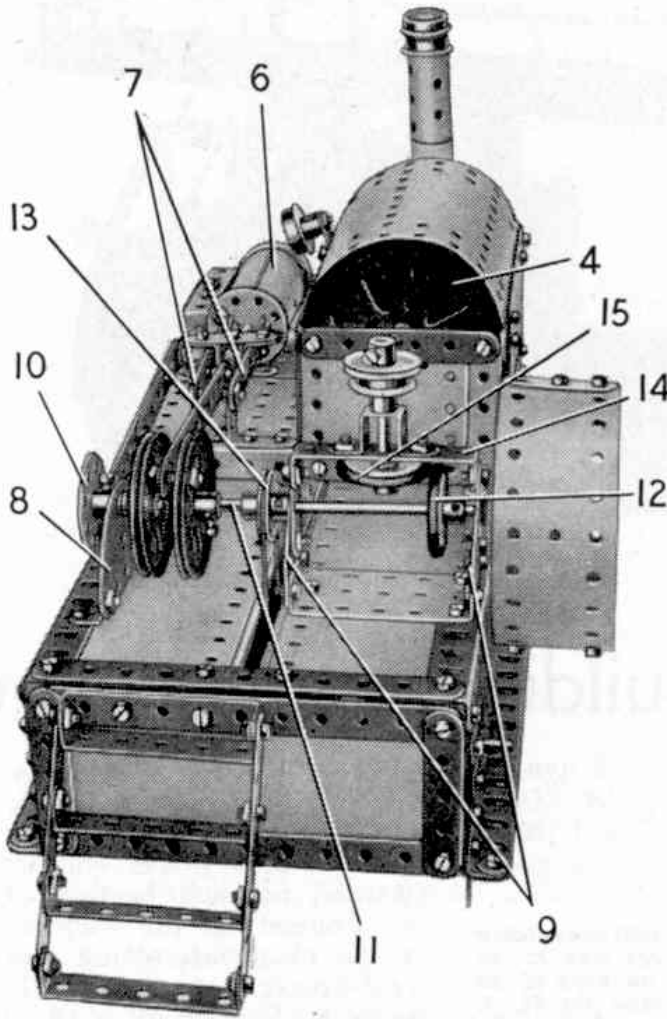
Another view of the steam engine and boiler showing the details of the crankshaft.
